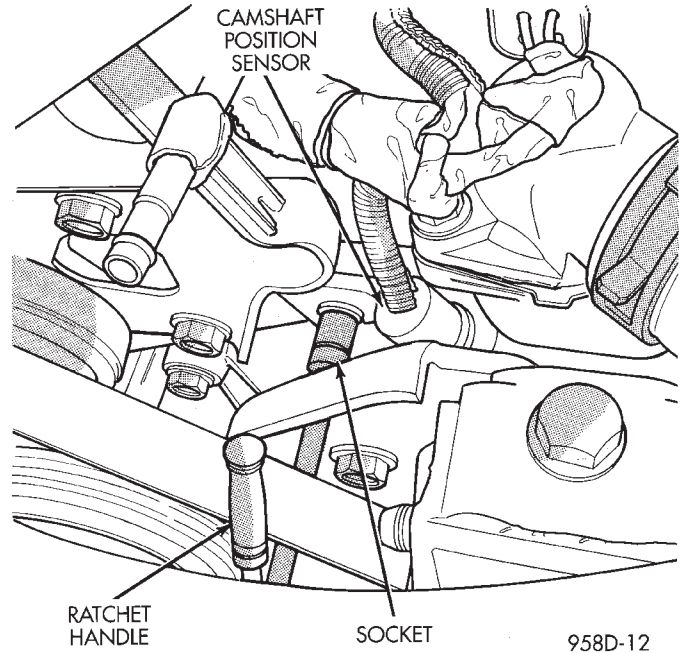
Camshaft Sensor Bolt Removal/Installation
